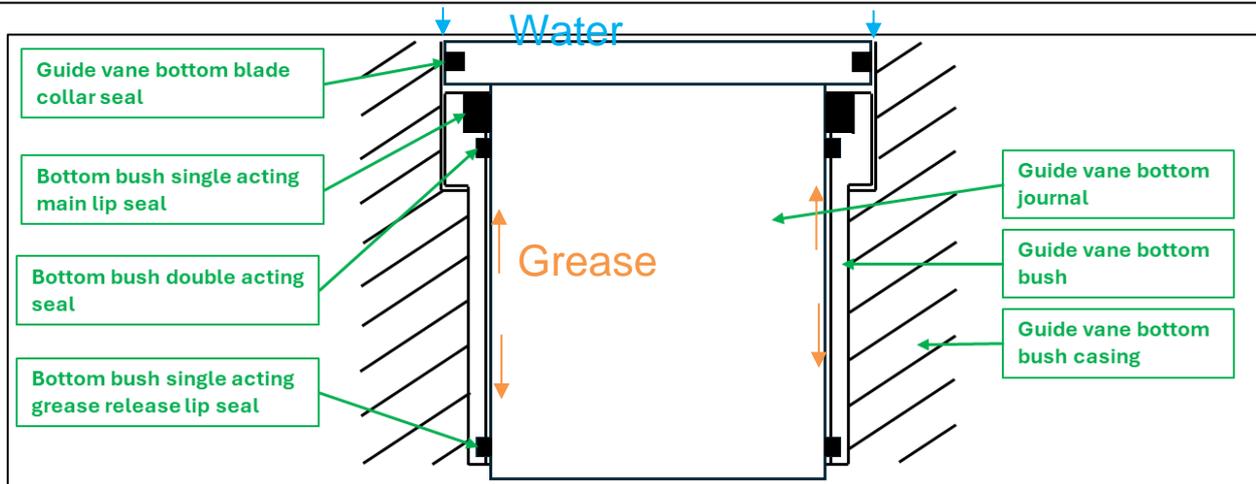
Guide vane bottom bush & journal assembly side view - illustrating location of seals
